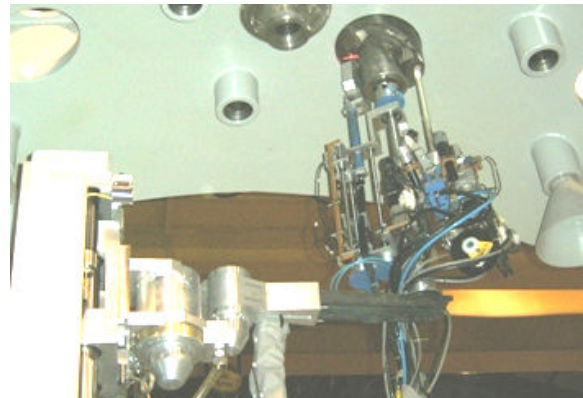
J-groove welding repair tool of CRD Nozzle.
